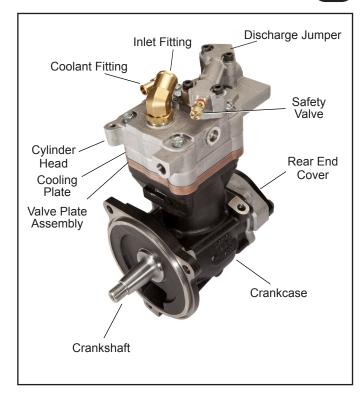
BENDIX® SNA-01™ COMPRESSOR
